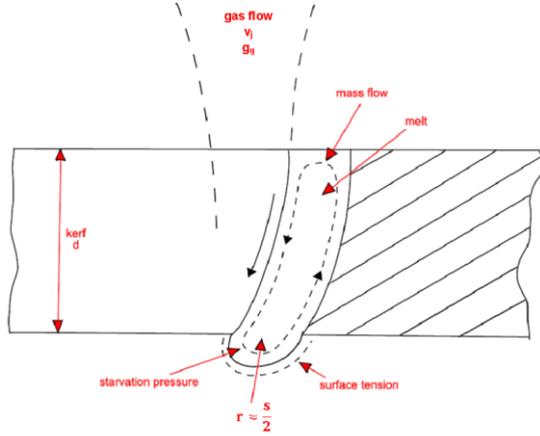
Cross Section of a Workpiece Partly Cut with a Laser, Left View Into the Kerf, Middle Molten Layer with Closed Loop Mass Flow, Right Part Still Uncut Material.
